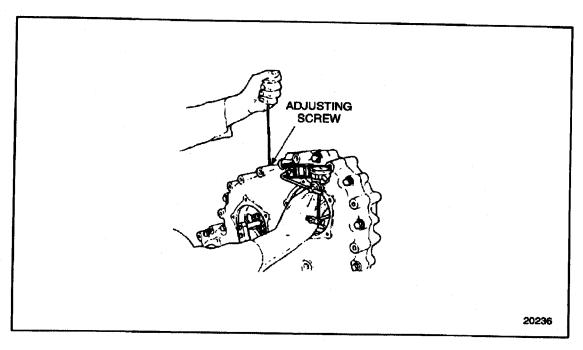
Checking Adjustable Idler Gear-to-Camshaft Drive Gear Lash
